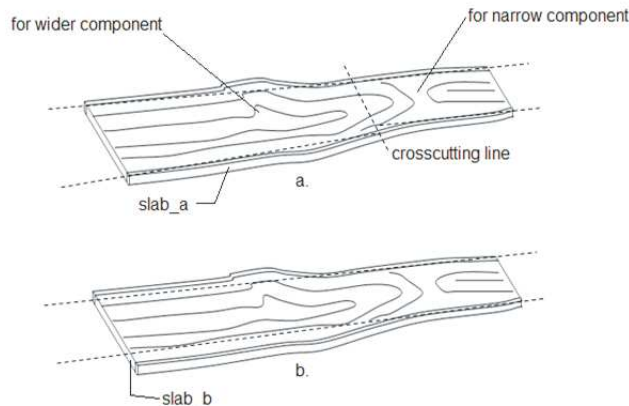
Cutting method for making furniture components: a. Current method, b. Making square prior to make component
